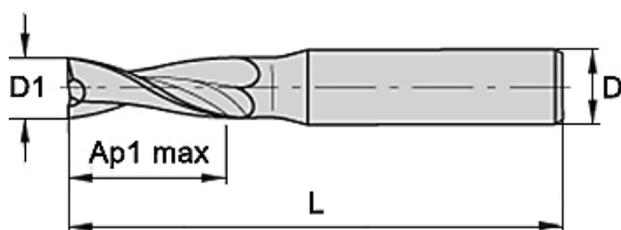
Cutting tool dimensions (D1: 8mm, z: 2, 30°).
